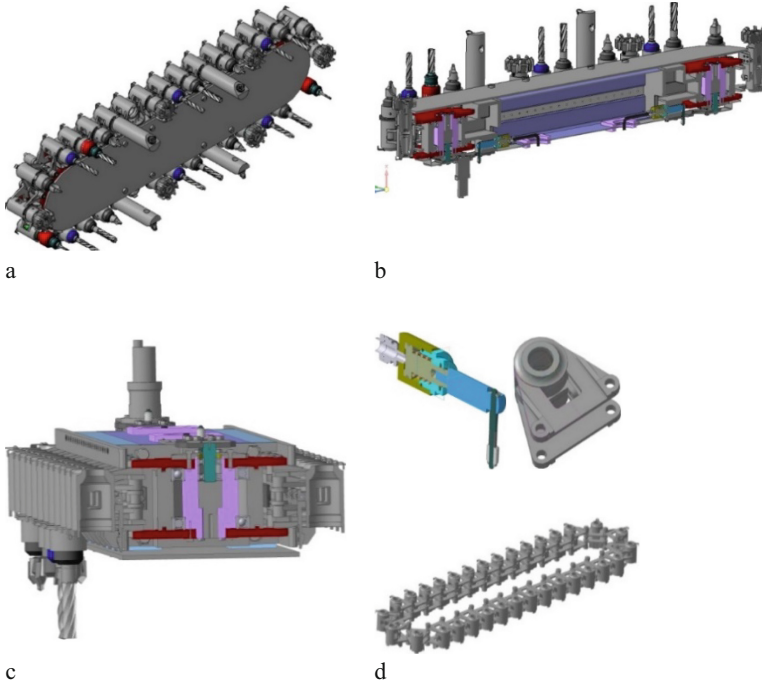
Three-dimensional model of a chain tool magazine: a – general view; b – longitudinal section; c – cross-section; d – chain and tool holder slot
